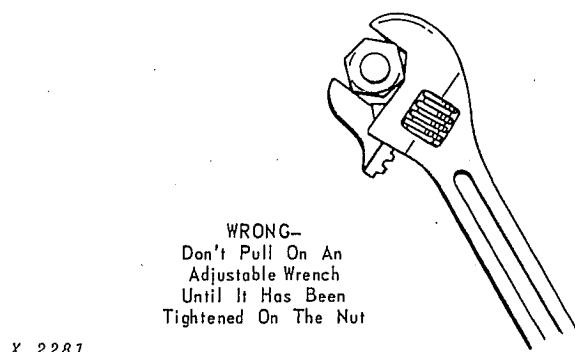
Tighten The Adjustable Wrench On The Nut
